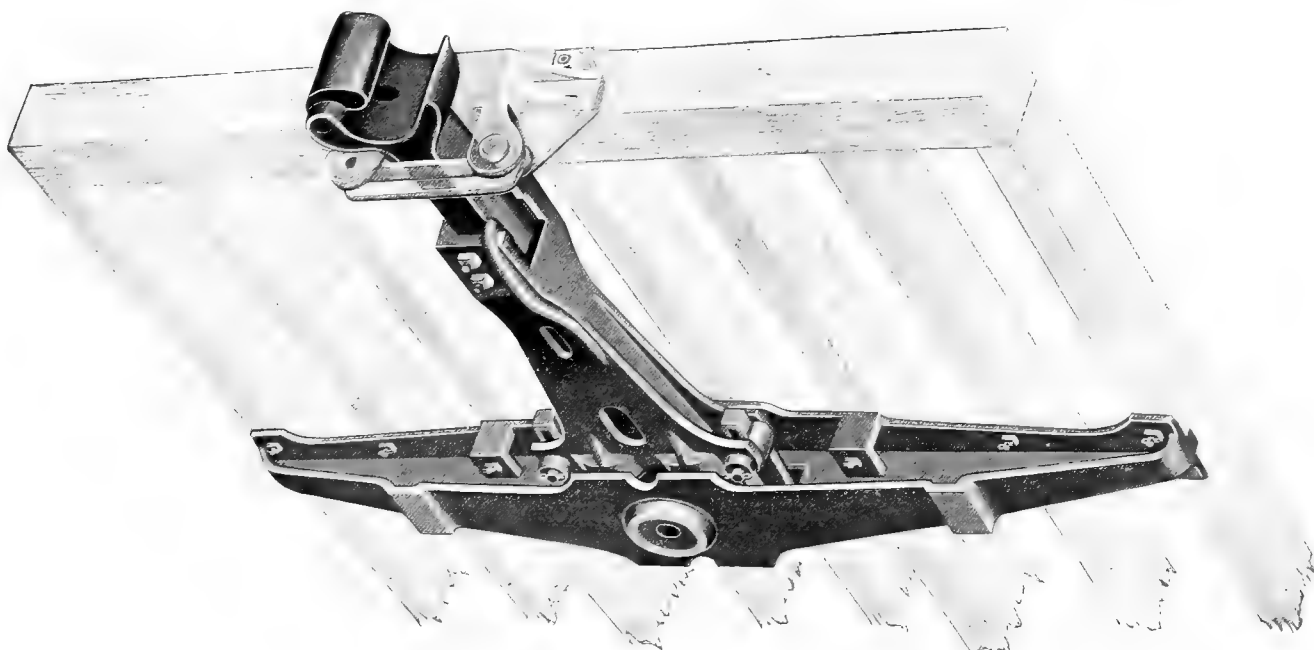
Commonwealth Cast Steel Transom Draft Gear. Commonwealth Steel Company.
